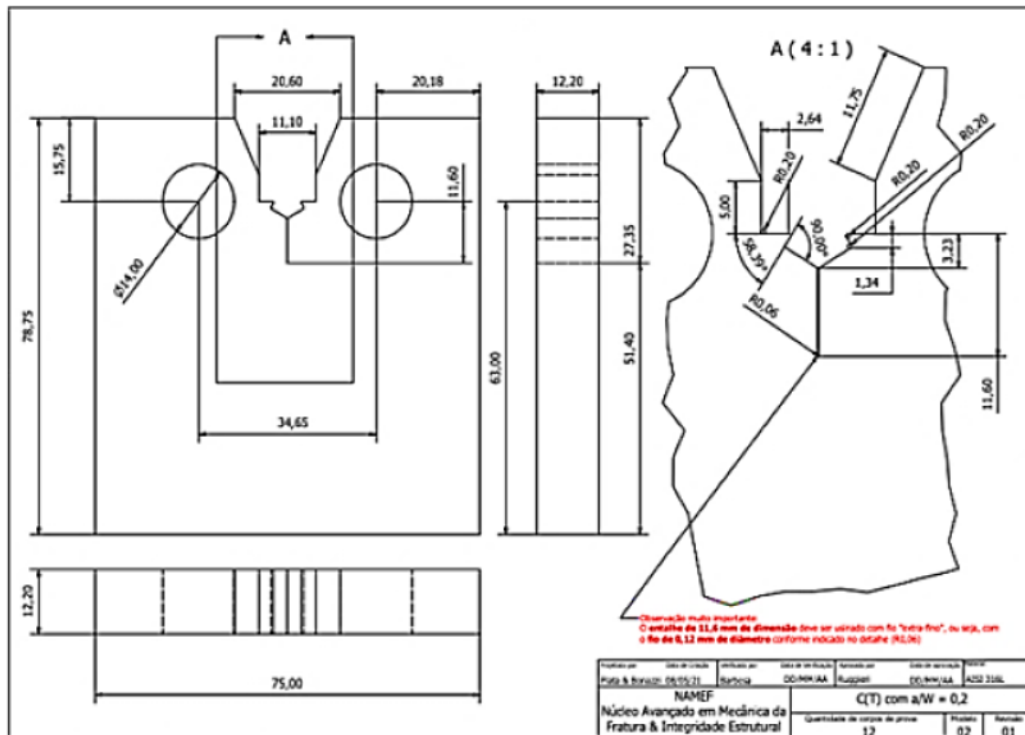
Geometry and dimensions of the specimen C(T) of 316L stainless steel material.
